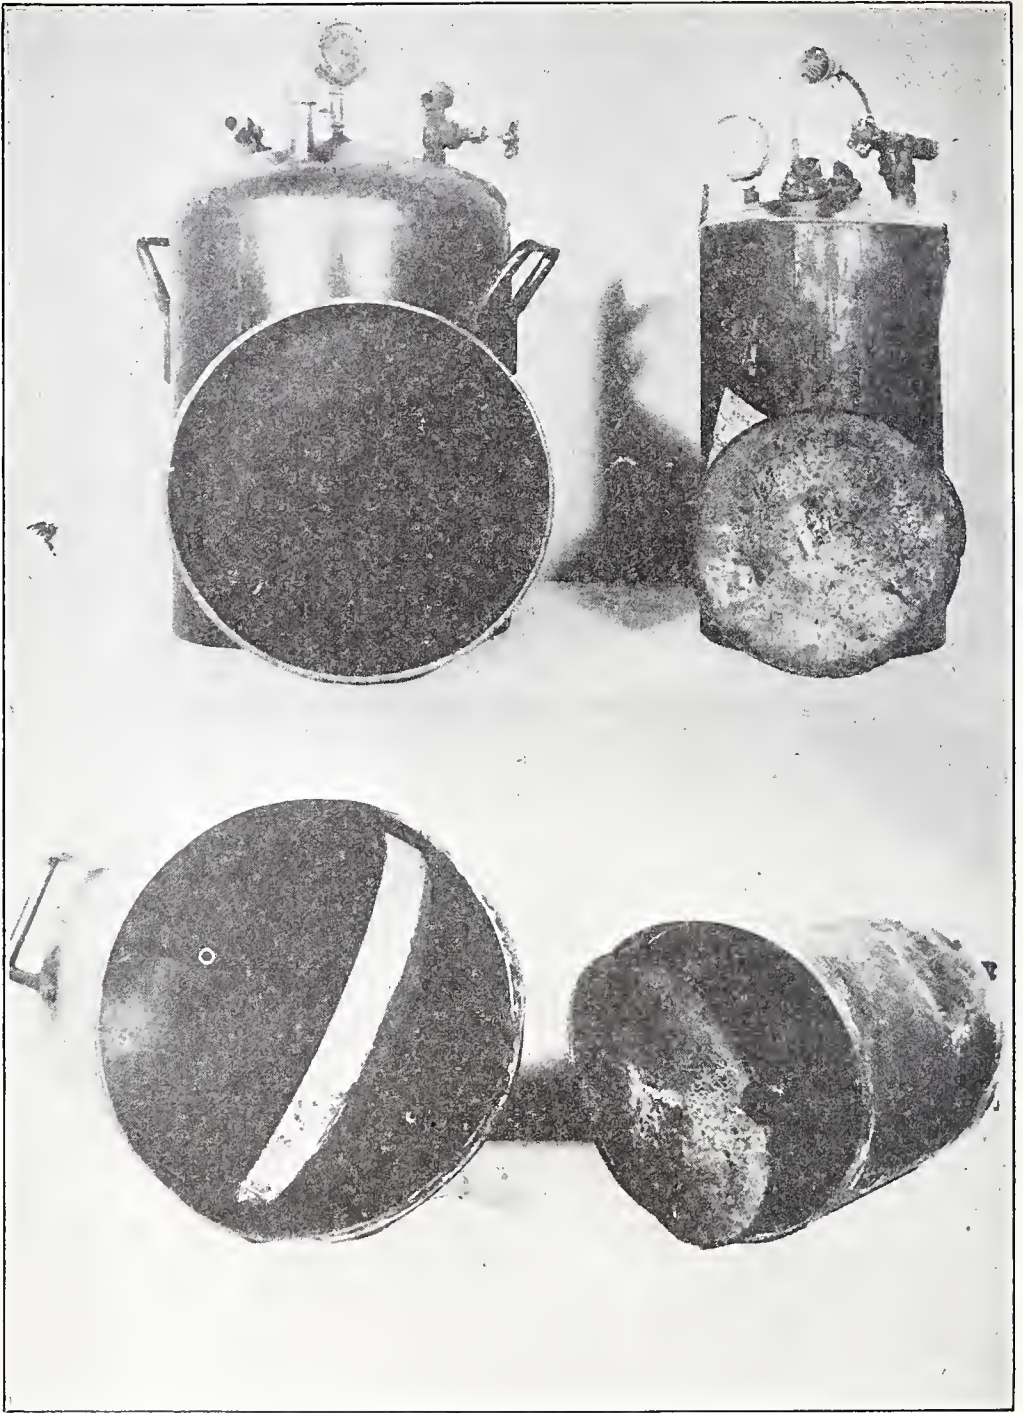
WELDED TANKS USED FOR THE PURPOSE OF OPERATING FLAME TORCHES
